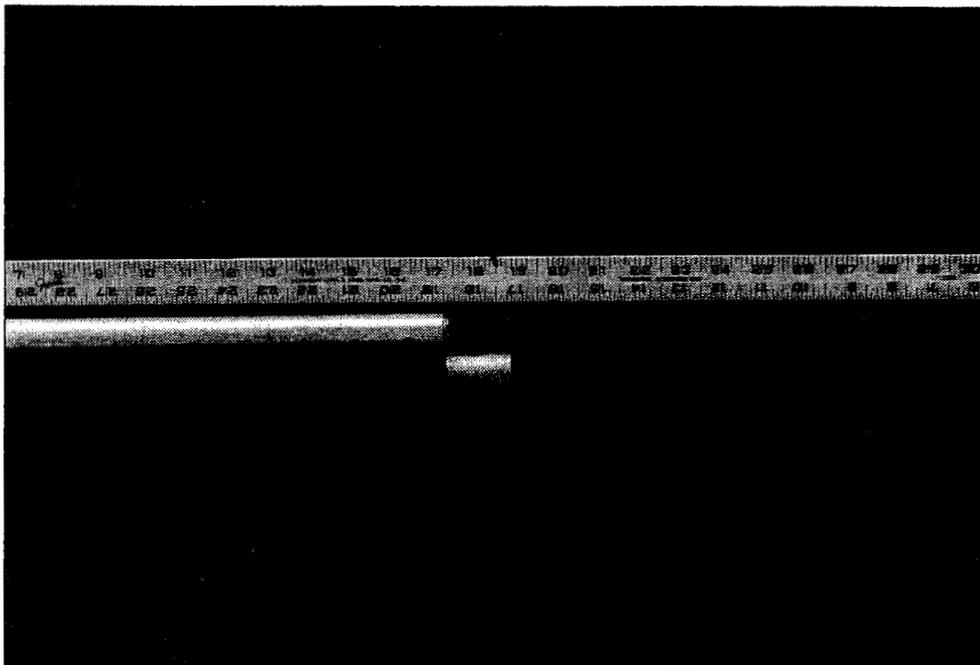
Coupling and pipe threads showing thread length relative to coupling length.
